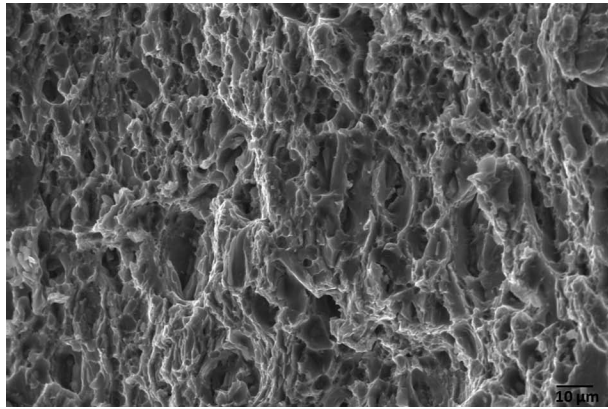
Fracture surface of a room temperature tensile-tested specimen of aluminum-lithium alloy AA 2195-T87 mandrel forged ring in tangential direction. Note extensive dimples throughout
